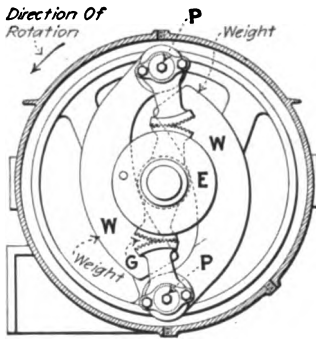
Hamilton uniflow-engine governor showing weights and eccentric-rotating sectors.
